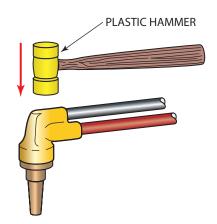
Tap the back of the torch head to remove a tip that is stuck. The tip itself should never be tapped.
